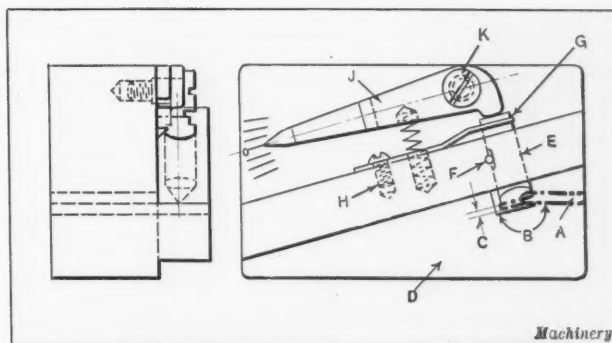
Gage for testing Angle and Thickness of Forged Part
